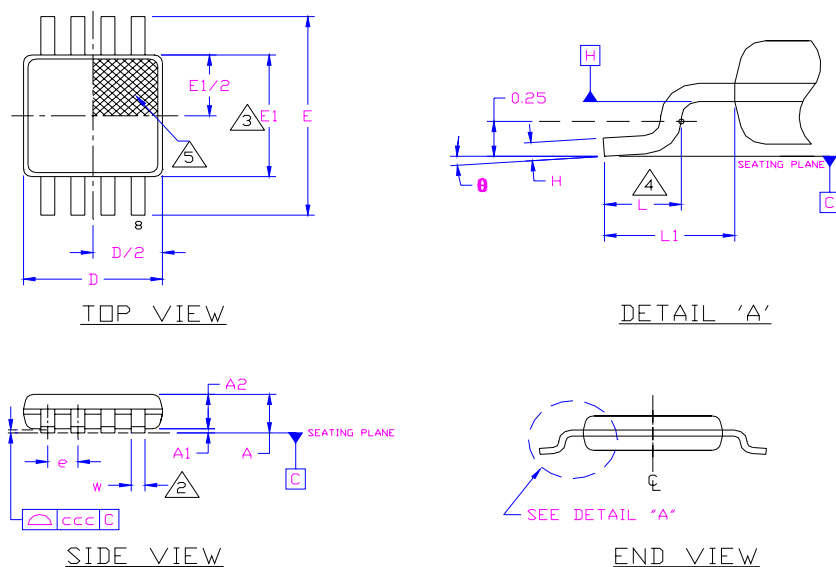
8-Pin TSSOP Package Outline - 3x3mm Body 0.65mm Pitch
